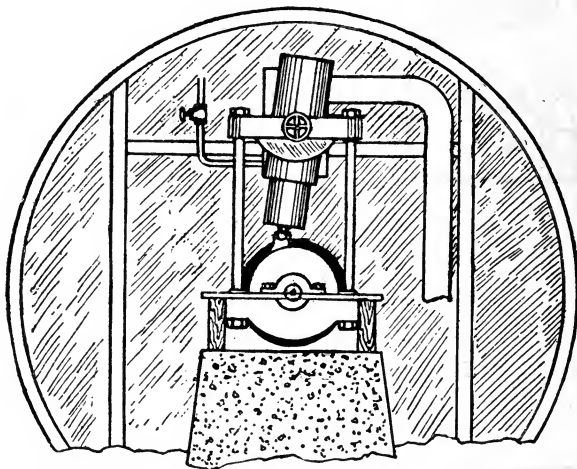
,645.—Graham special trunk piston transfer expansion steam jacketted oscillating engine direct connected to blower. This method of jacketting is such that the steam passing through the cylinder is brought into more intimate contact with the jacketted walls than in any other system, thus permitting a high degree of expansion without condensation. The value of steam jackets and the proper condition under which they should be used are not generally understood. The author's claim that this engine is as economical as the ordinary compound is based on his investigation of steam jackets and test data especially that of Donkin.
